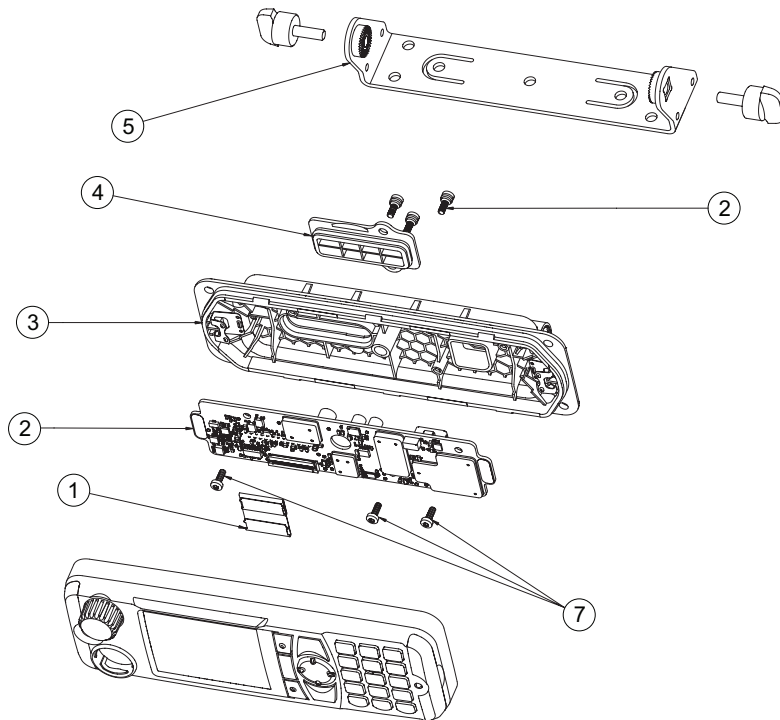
Remote Mount Ethernet Control Head – Exploded View
